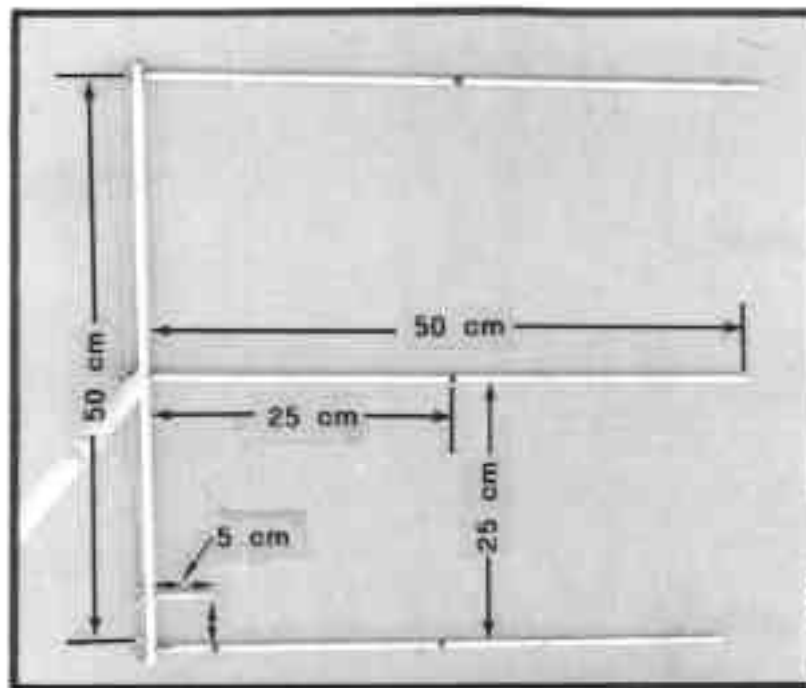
Nested frequency plot frame specifications. Measurements shown are inside dimensions. The four prongs must be cut 2 cm longer to provide for threading the ends and the aluminum back piece must be cut 2 cm longer to provide for 1/4-in tapped drill holes for the edge prongs.
